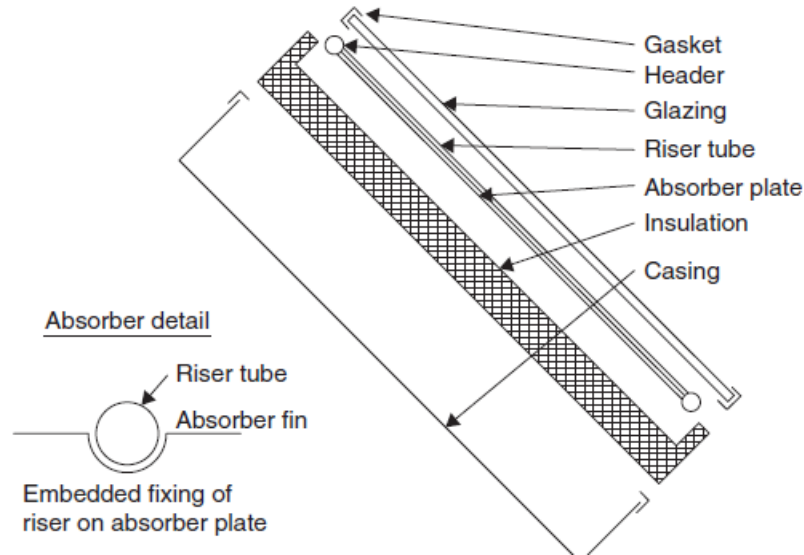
Exploded view of a flat-plate collector and absorber details [30]
